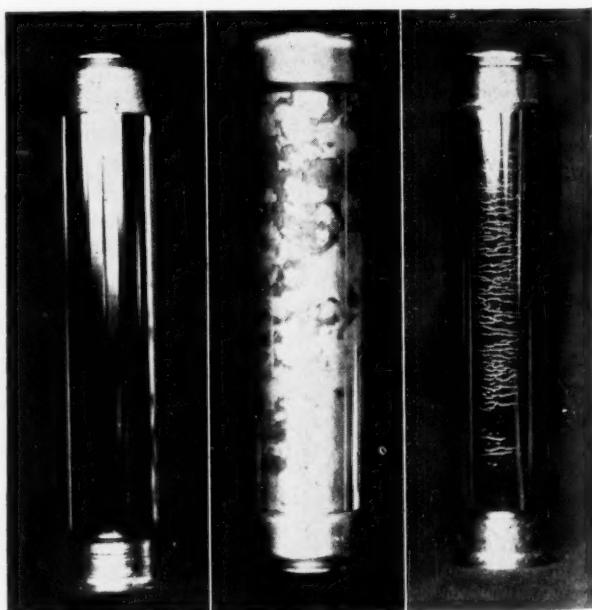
Piston rod of aircraft engine. Defects shown by electrolytic superfinishing.
